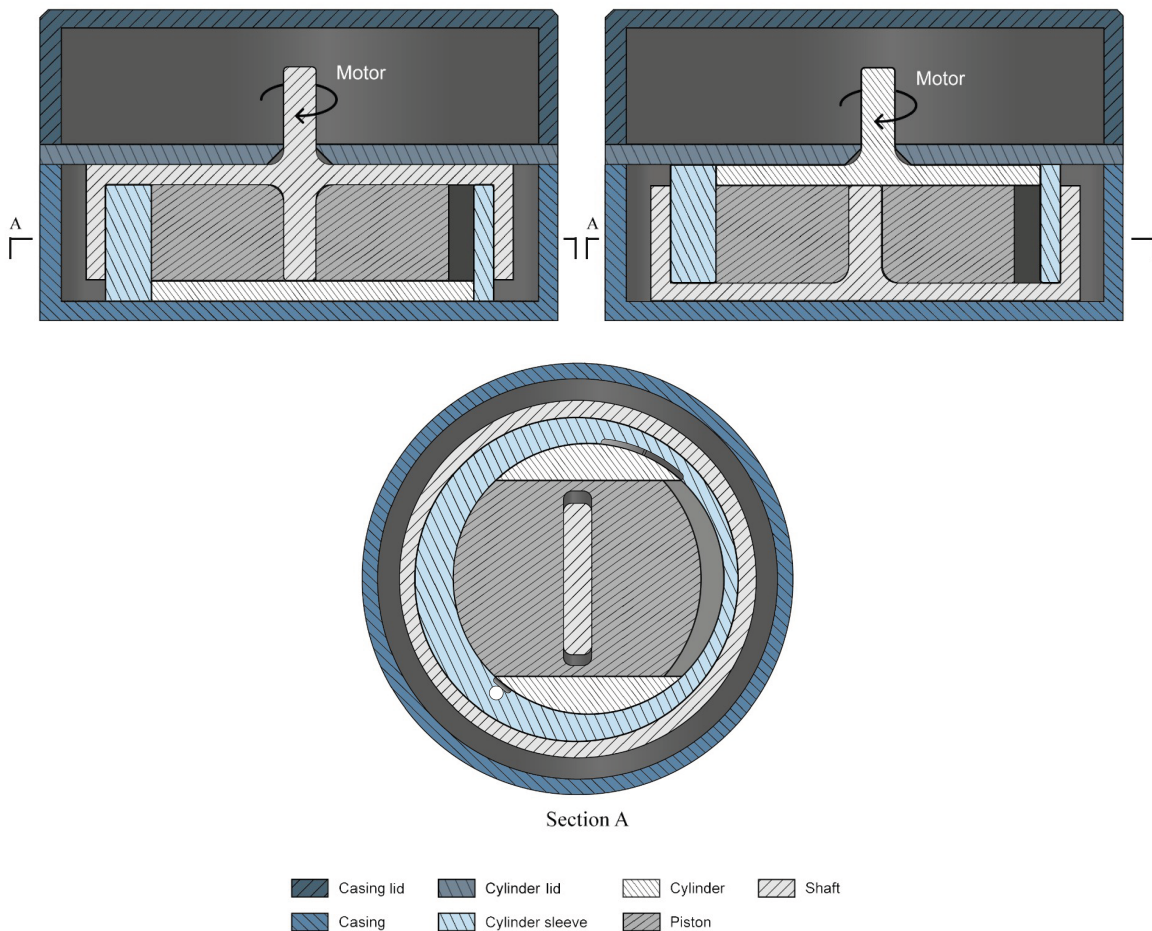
Front and top cross-sectional views of a shaft-actuated (left) and cylinder-actuated (right) compressor with 'folded' shaft rotary bearing to prevent the introduction of a moment and with a separate cylinder sleeve component.
